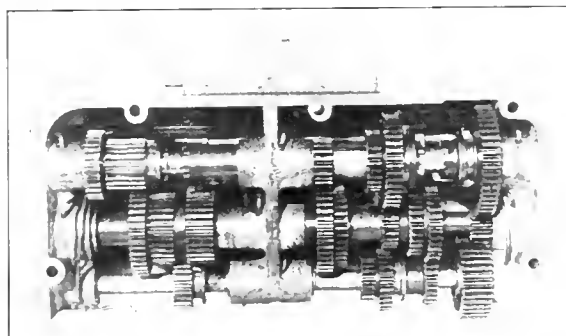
A Part of the Sliding Transmission That Remains in the Removable Part of the Gear Box
